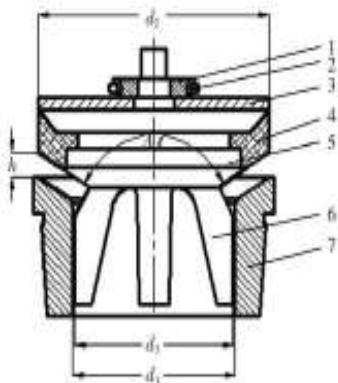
Fracturing pump hydraulic end structure: 1. clasp, 2. circlip, 3. spring plate, 4. pump rubber, 5. valve plate, 6. guide pawl, 7. seat
